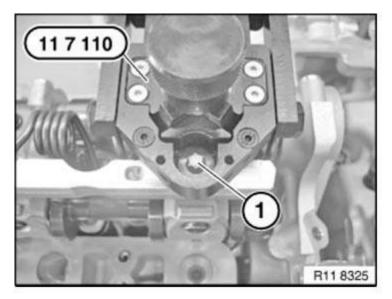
Identifying Return Spring With Screws And Special Tool 11 7 110 Courtesy of BMW OF NORTH AMERICA, INC.
